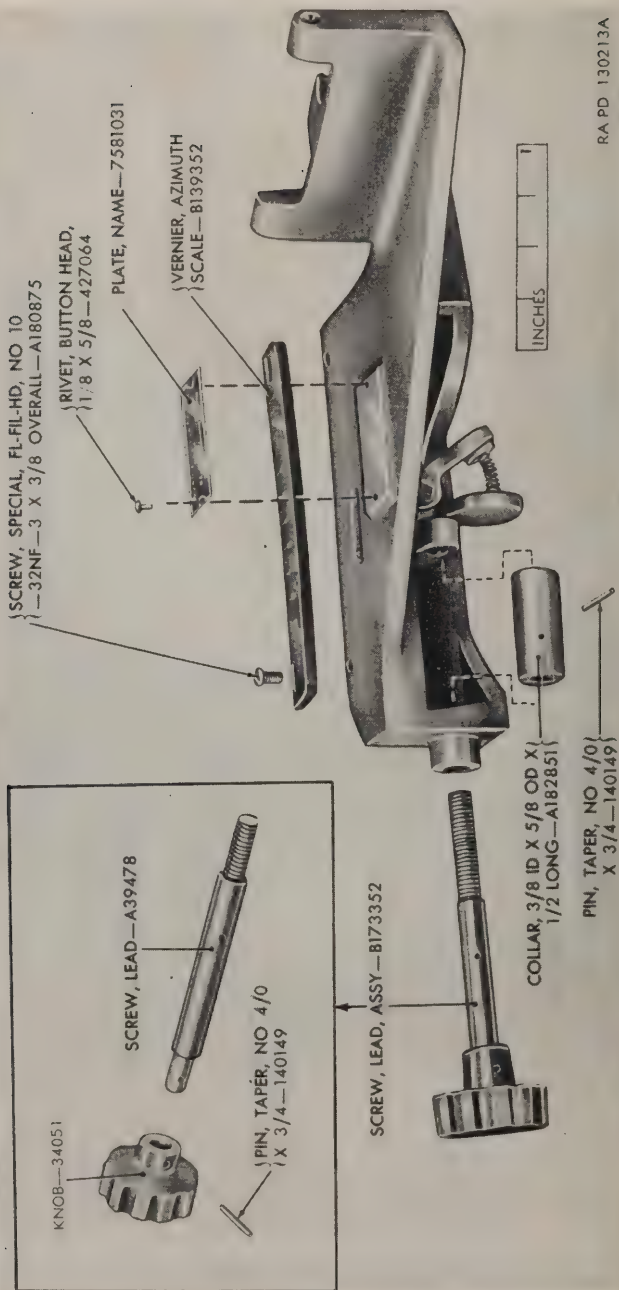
Components of the bracket-plotting boards M5 and M5A2 partially exploded.
